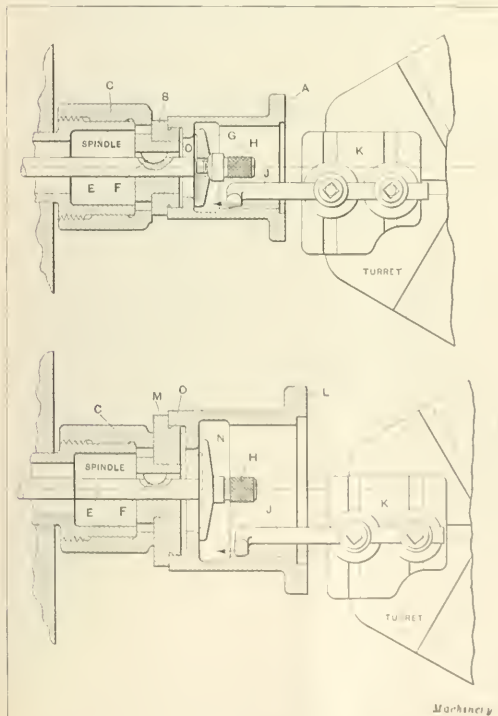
Fixture for boring Pot Castings on Horizontal Turret Lathe; Different Clamping Collars are provided for Different Sizes of Work
